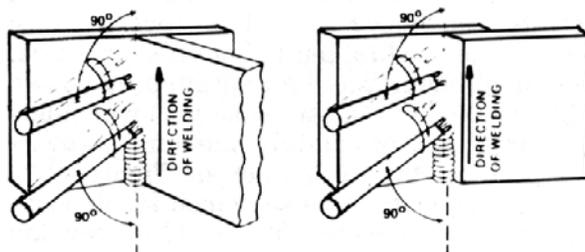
Fillet Weld - Vertical Tee Joint
